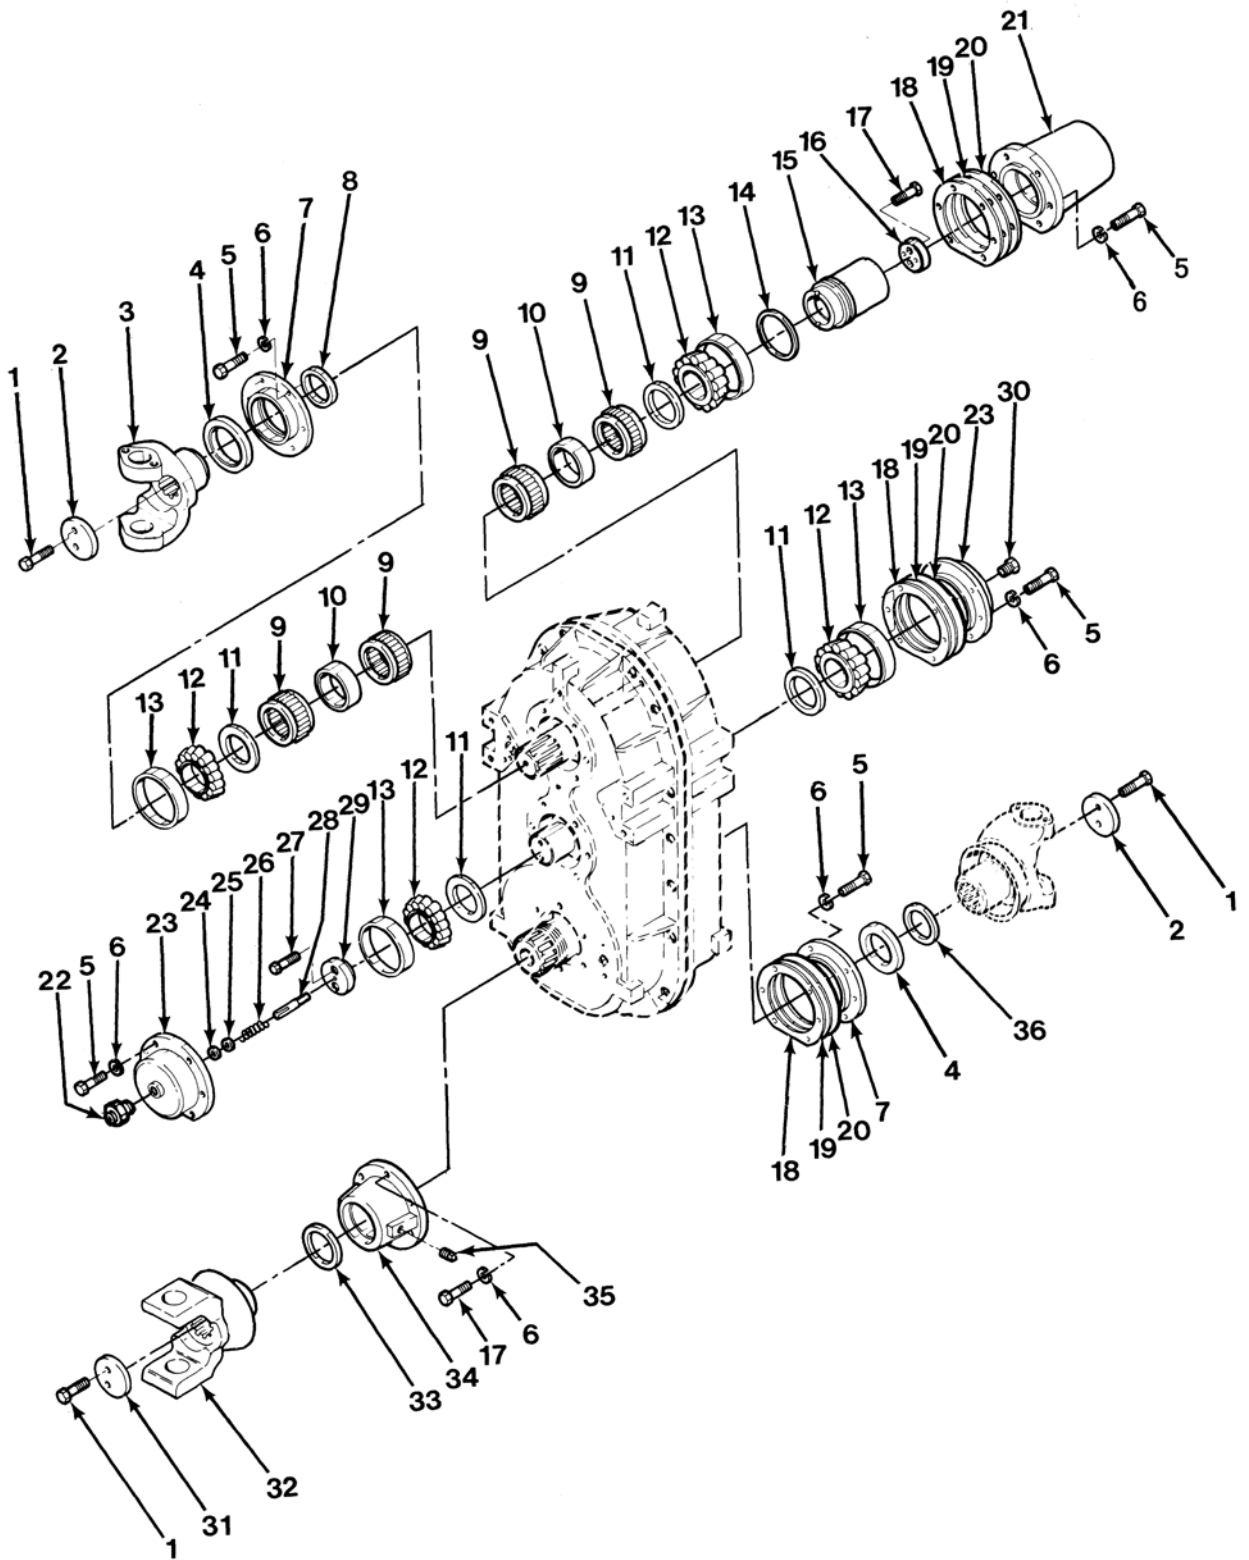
TRANSFER CASE ASSEMBLY (SHEET 1 OF 2)
